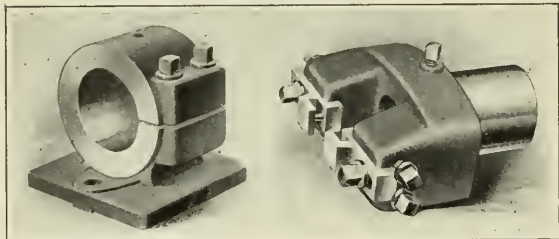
Standard Type of Tool-holder used on Turret Slide of Gridley Automatic Turret Lathe
